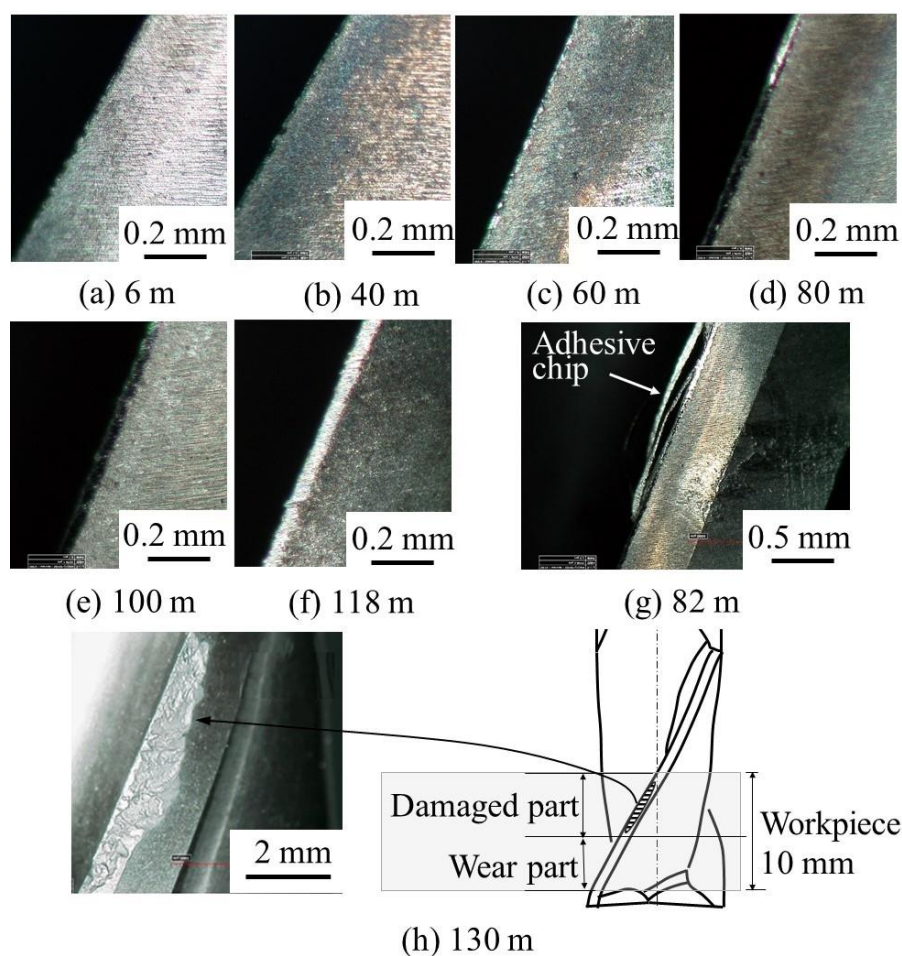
Changes in the flank wear of tool edge with increasing cutting distance.
